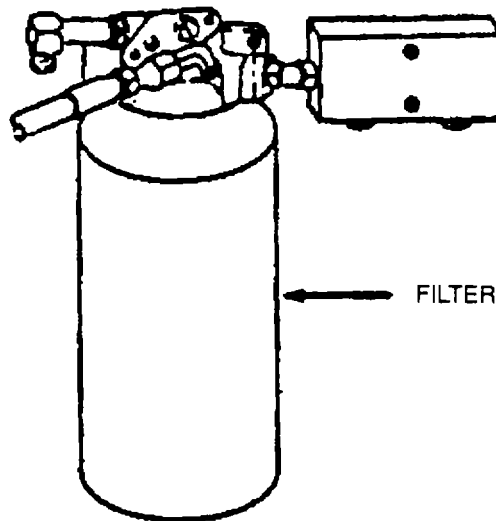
HP Pump Diesel Engine Fuel Filter.
